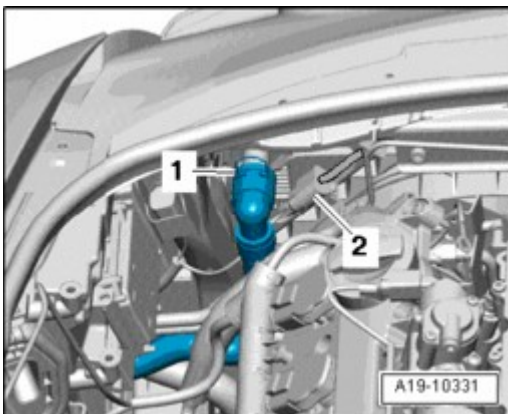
Disconnecting Coolant Hose At Top Left Of Radiator & Removing Lid Lock Electrical
